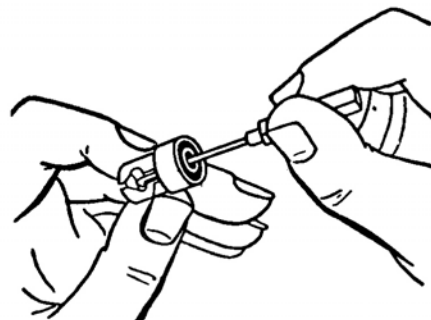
Use hooked scraper to clean carbon from pressure chamber.
